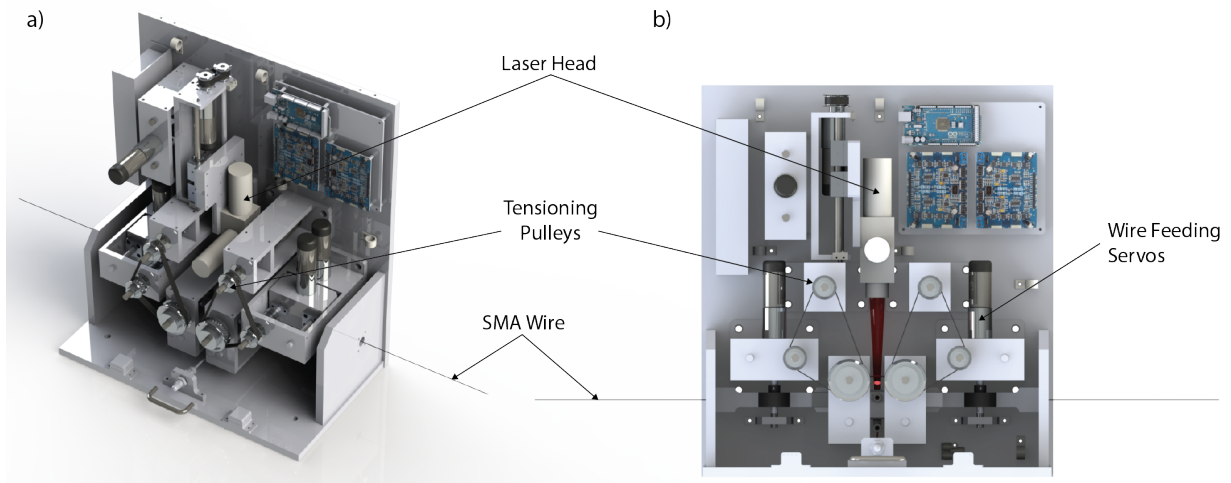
3D renderings of Wire feeding and laser processing SMA fabrication setup used to produce the wire with dual-roller on each side and adjustable vertical tension on the wire.
